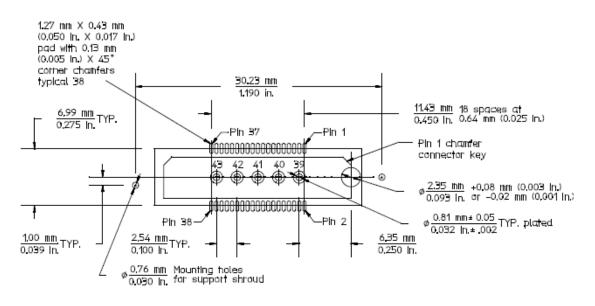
38-pin MICTOR connector footprint and support shroud mounting hole dimensions.
